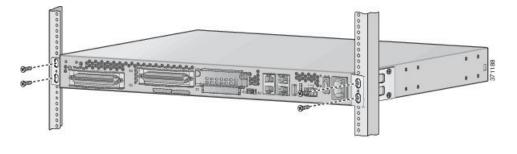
Attaching the Brackets to a Chassis (For Telco 19-Inch Rack)
